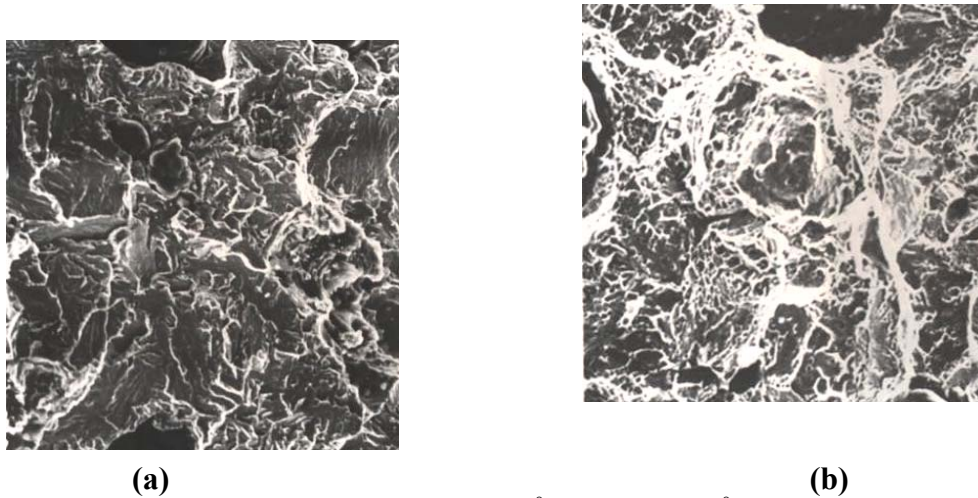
Fractographs of samples austenised at (a) 240°C and (b) 360°C.
